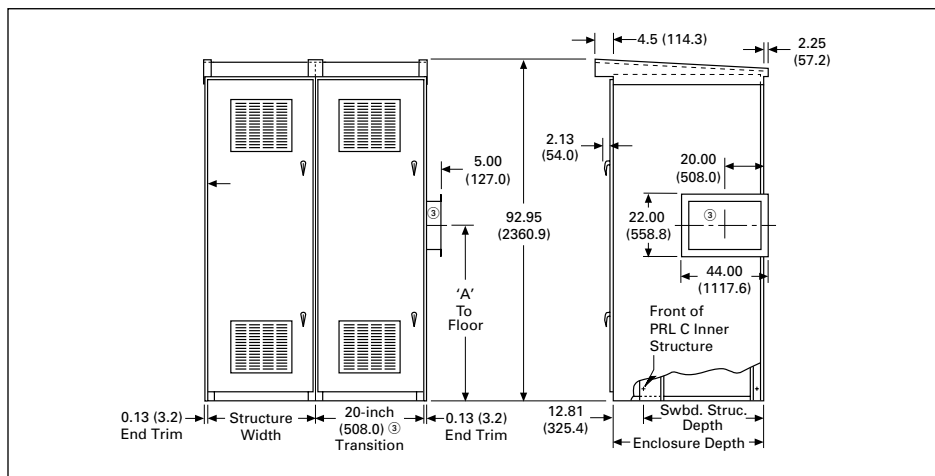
Front Access—Non-Walk-in with Sloped Roof—Dimensions in Inches (mm)
